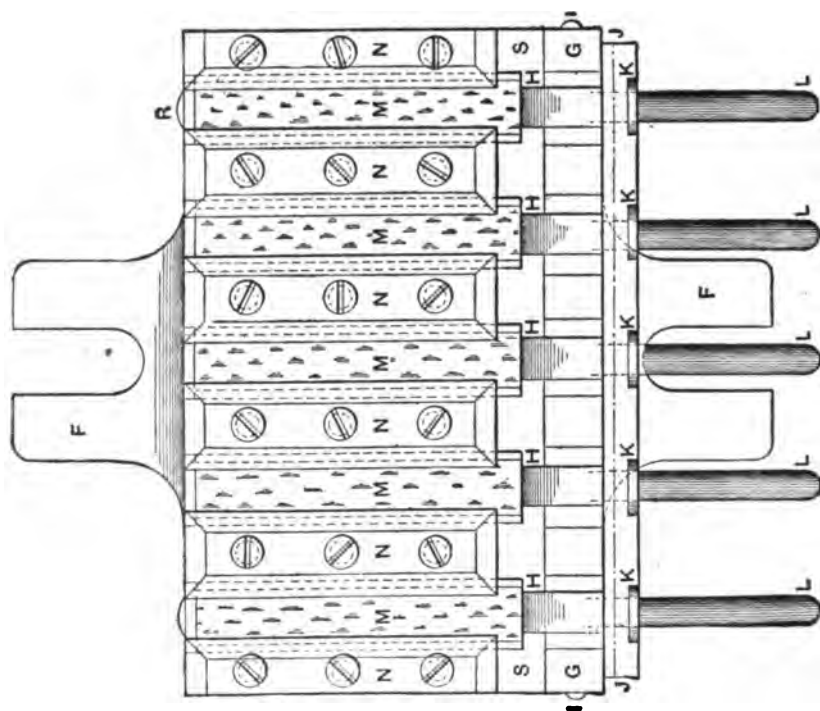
Plan of Fixture for Milling Work shown in Fig. 63
